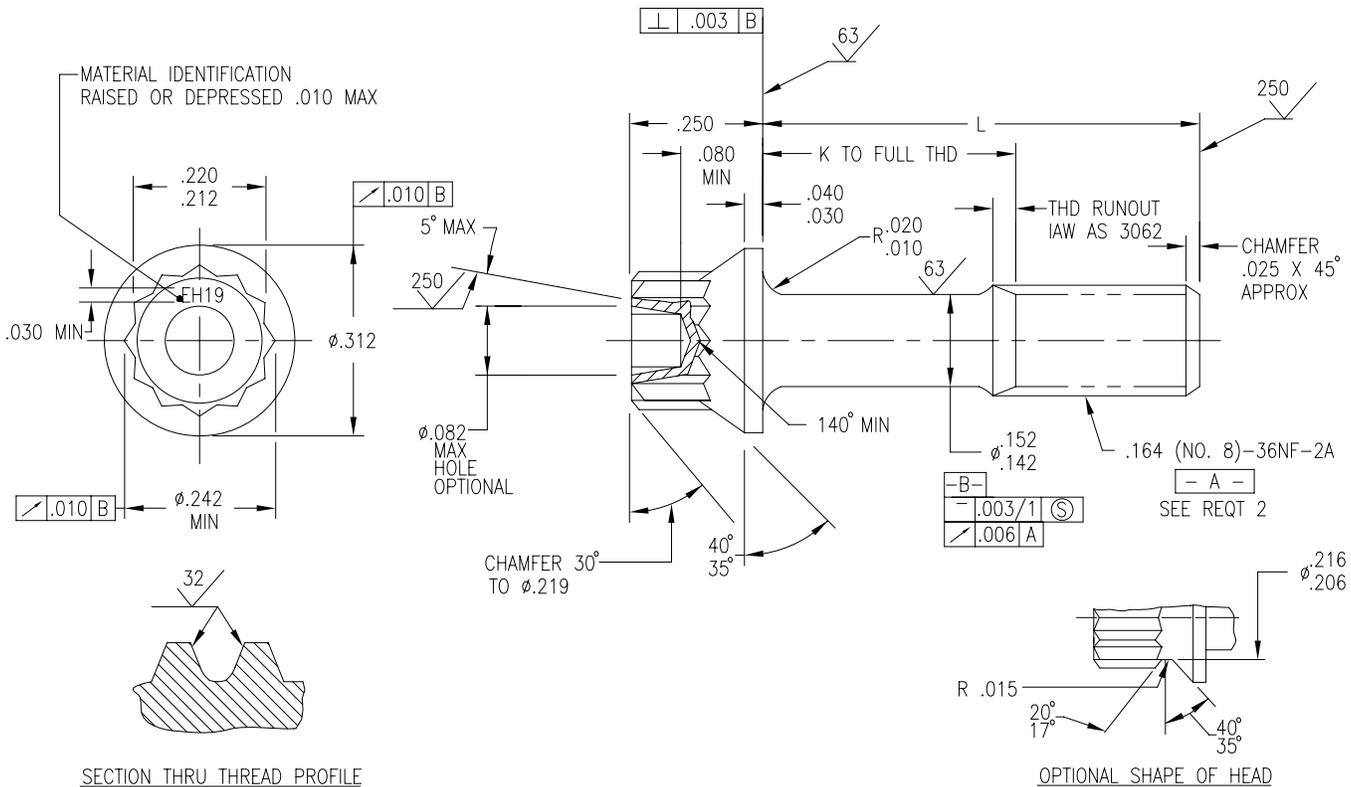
Screw, machine-CRES, double hexagon extended washer head, .164-36
